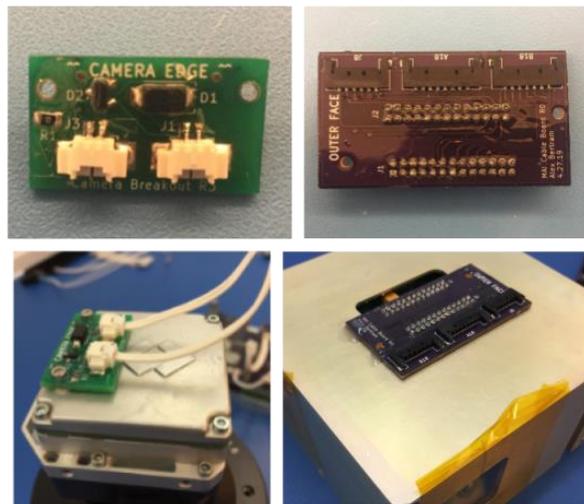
Payload (top/bottom left) and ADCS (top/bottom right) interface boards
